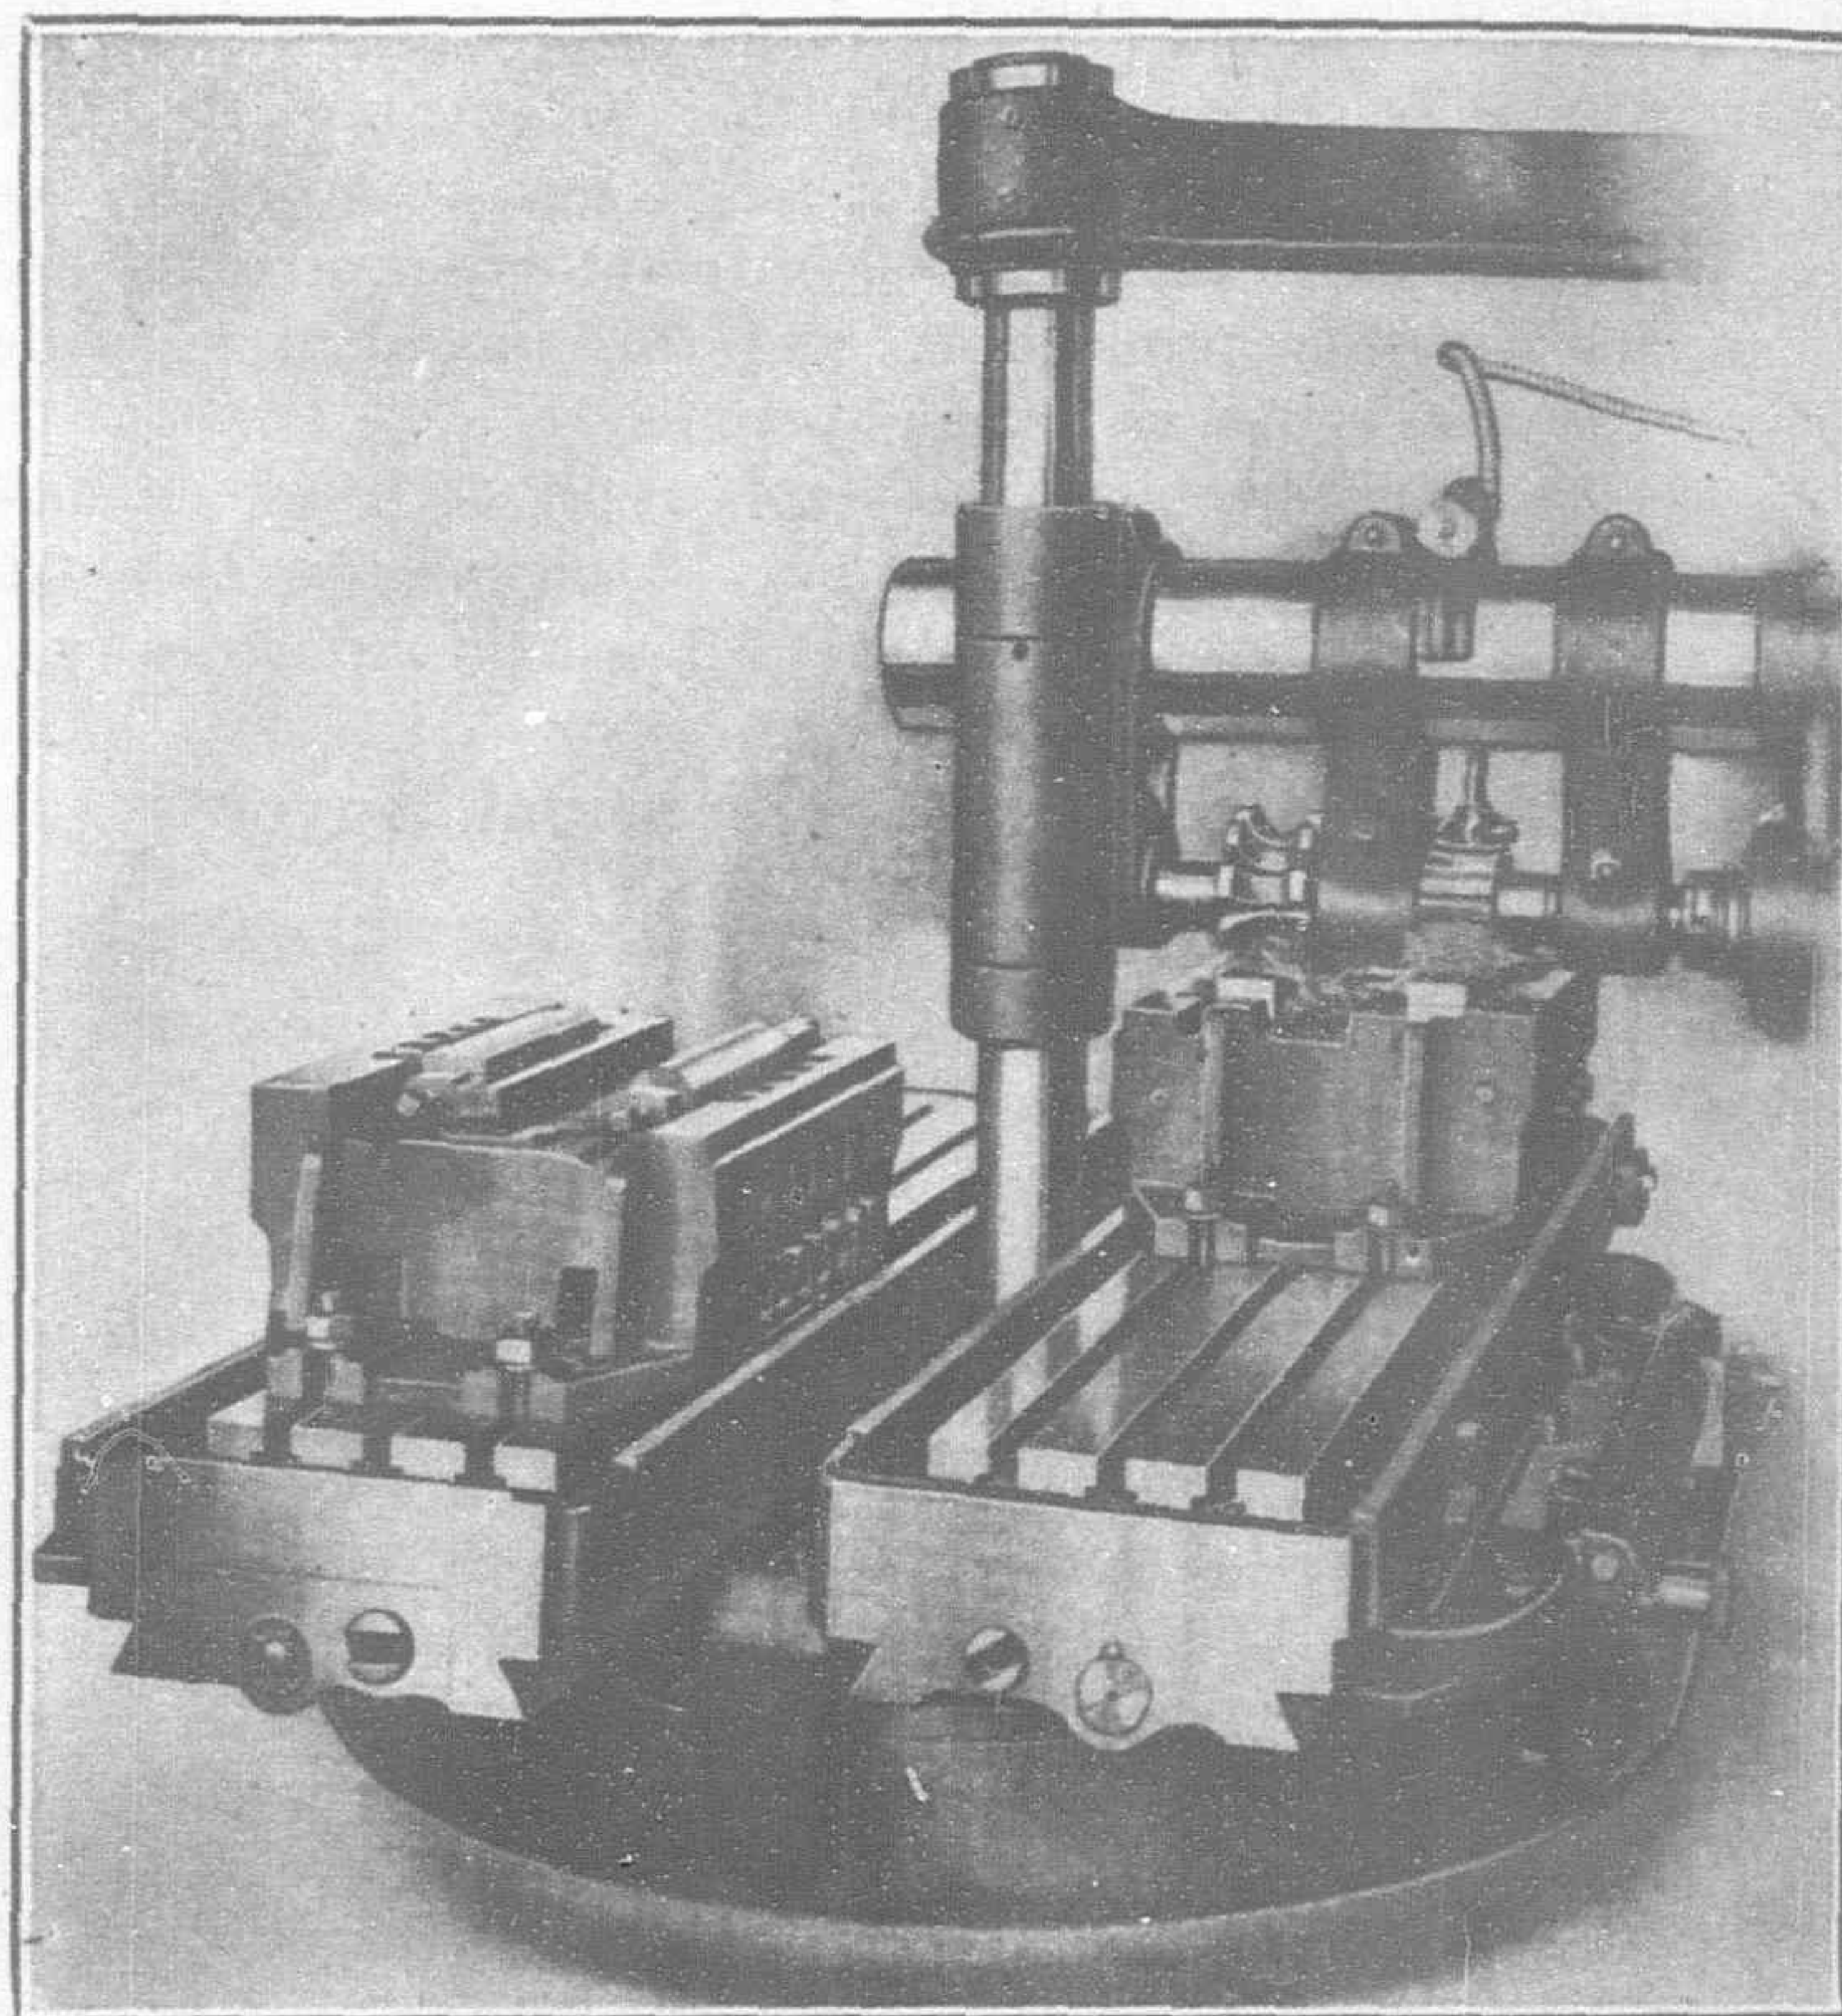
2-M HORIZONTAL AUTOMATIC MILLING MACHINE.
